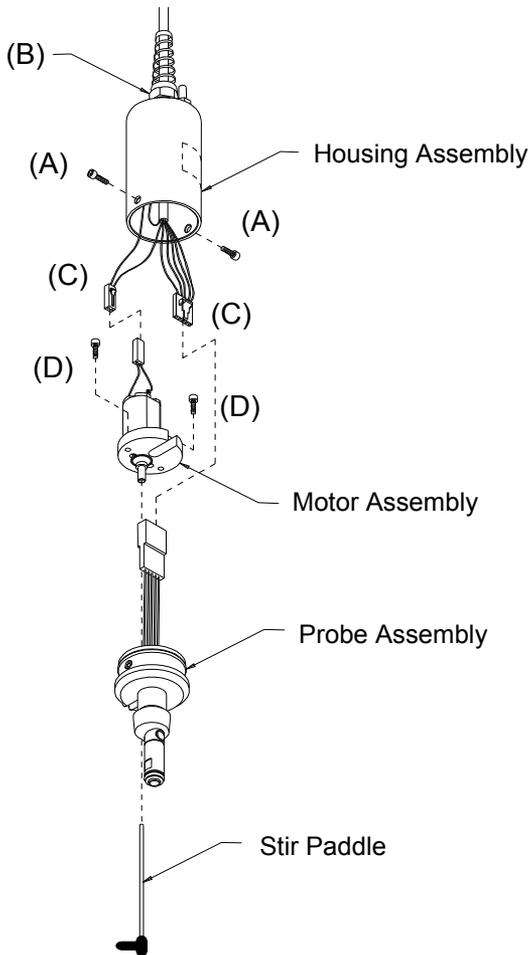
Exploded View of 5905/5010/200-BOD/Pro-BOD Probe
